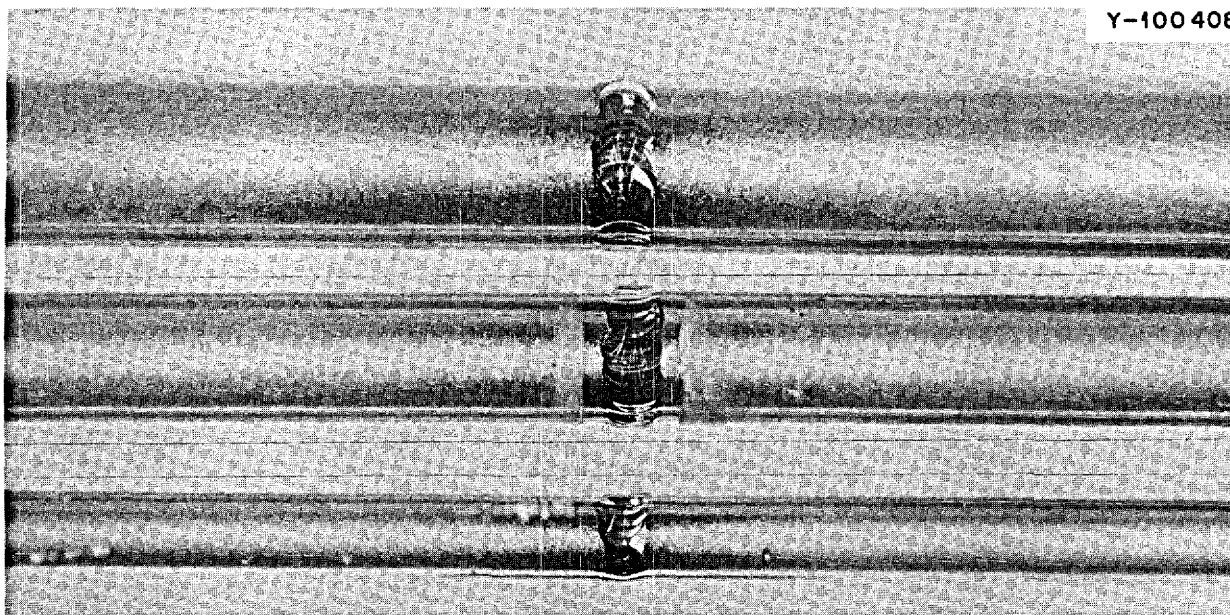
Typical Manual Gas Tungsten Arc Welds in Thin-Walled $\frac{1}{4}$ -, $\frac{3}{8}$ -, and $\frac{1}{2}$ -in.-diam Molybdenum Tubes. Filler wire was $\frac{1}{32}$ -in.-diam low-carbon, low-oxygen molybdenum.
